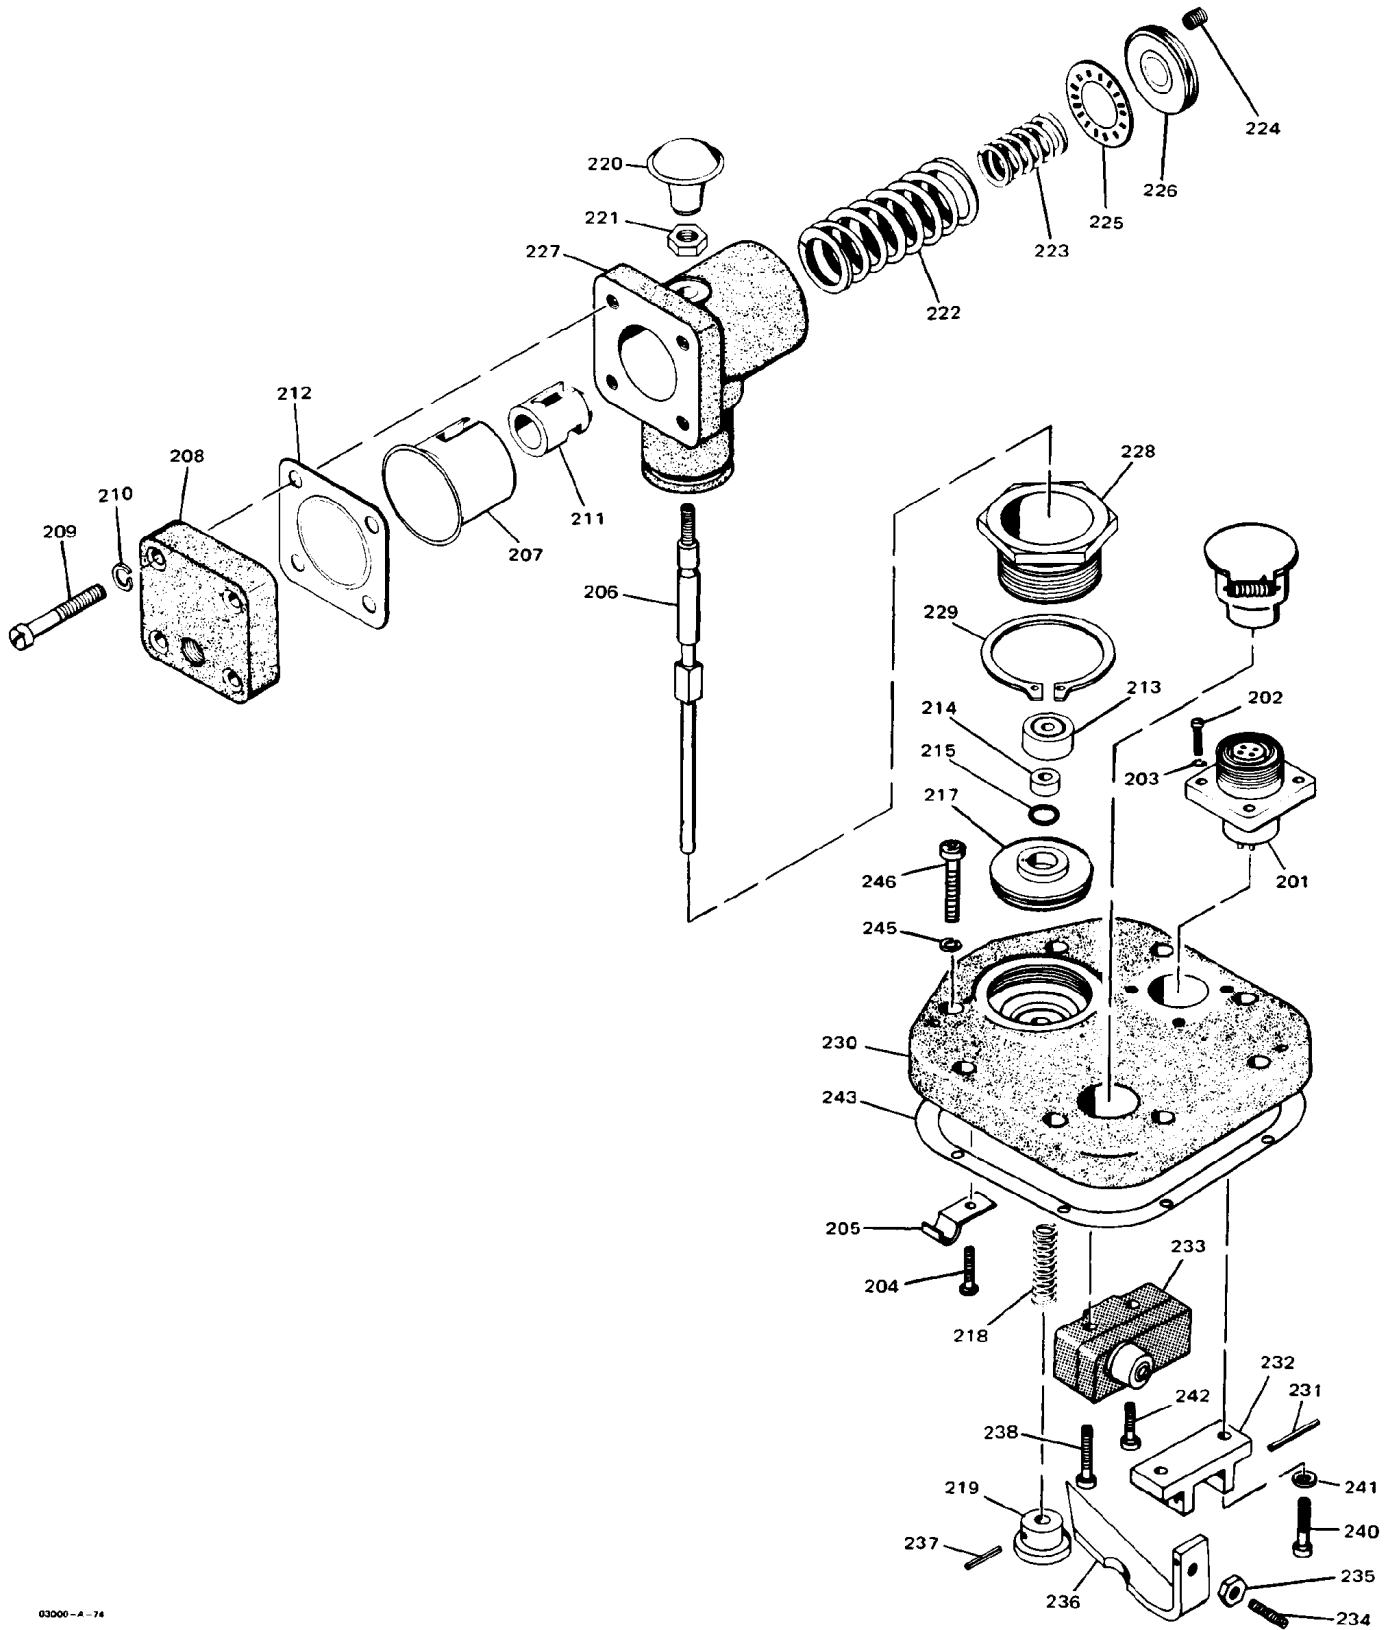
Exploded View of 26 to 69 psi Lube Oil Shutdown
